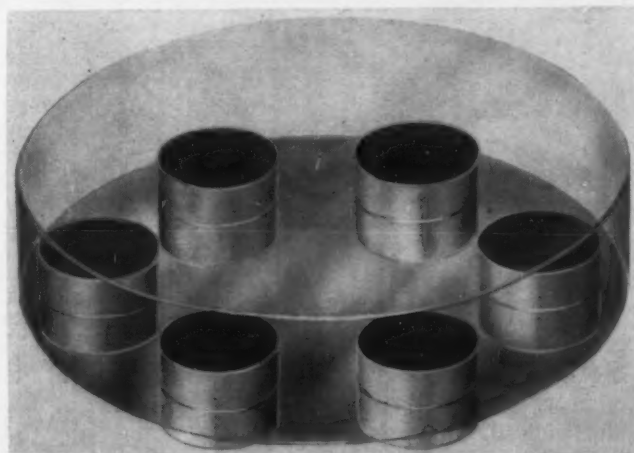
Titanium casting used for contamination measurements, showing arrangement of graphitic specimens.
